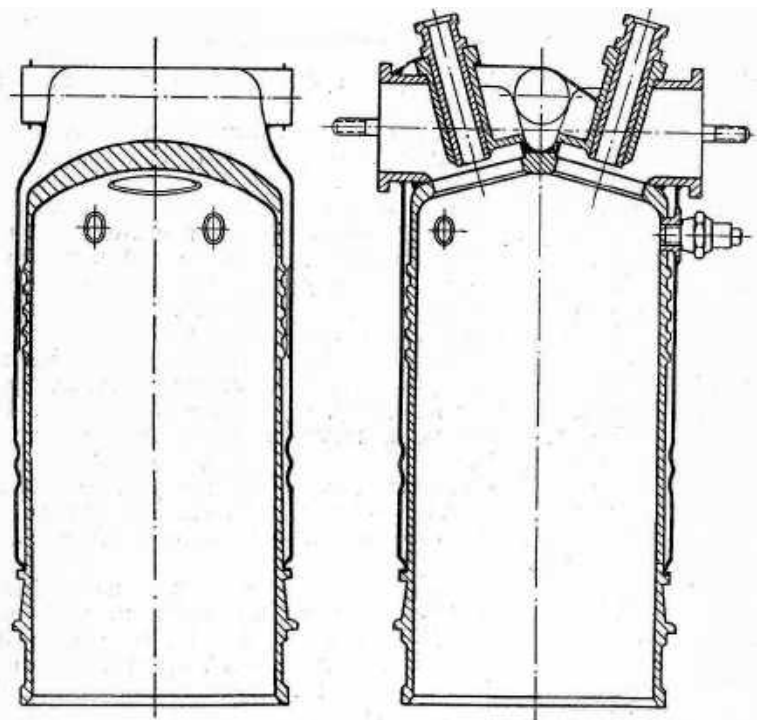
Cylinder of the twelve-cylinder V-shape engine M-17
